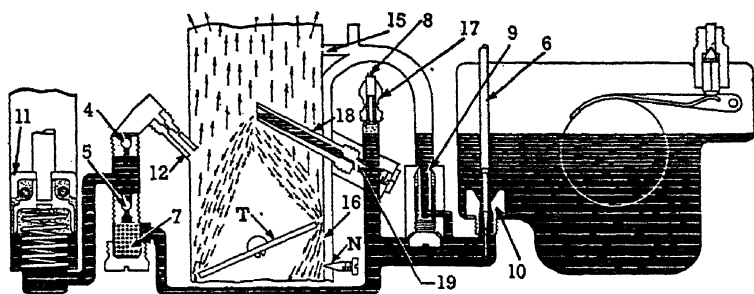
Diagrammatic Layout of Carter Carburettor.
